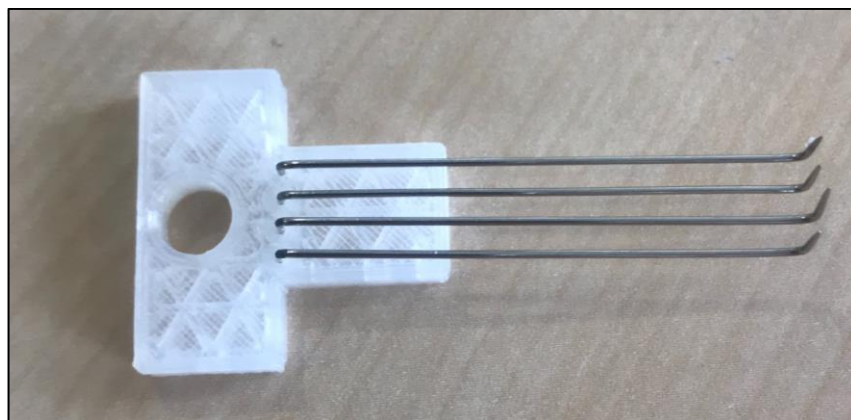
Final grip design using a 3D printed stage of low-friction nylon with four stainless steel quilter's pin tines
